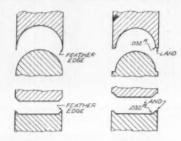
PARTS WITH BEVEL OR RADIUS EDGE
